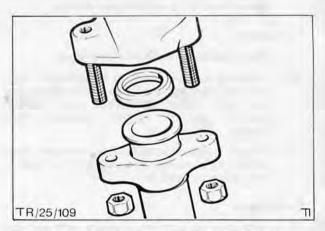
Exhaust manifold front down pipe clamping with sealing ring
